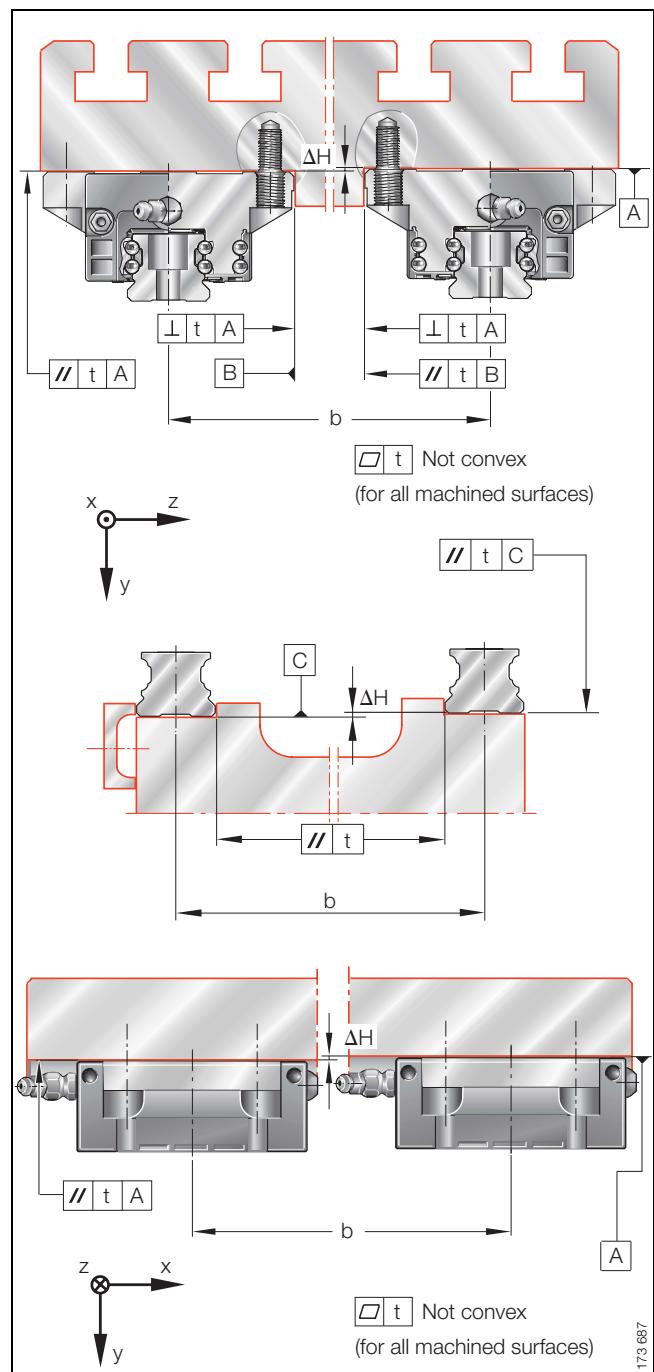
· Tolerances of mounting surfaces and parallelism of mounted guideways
